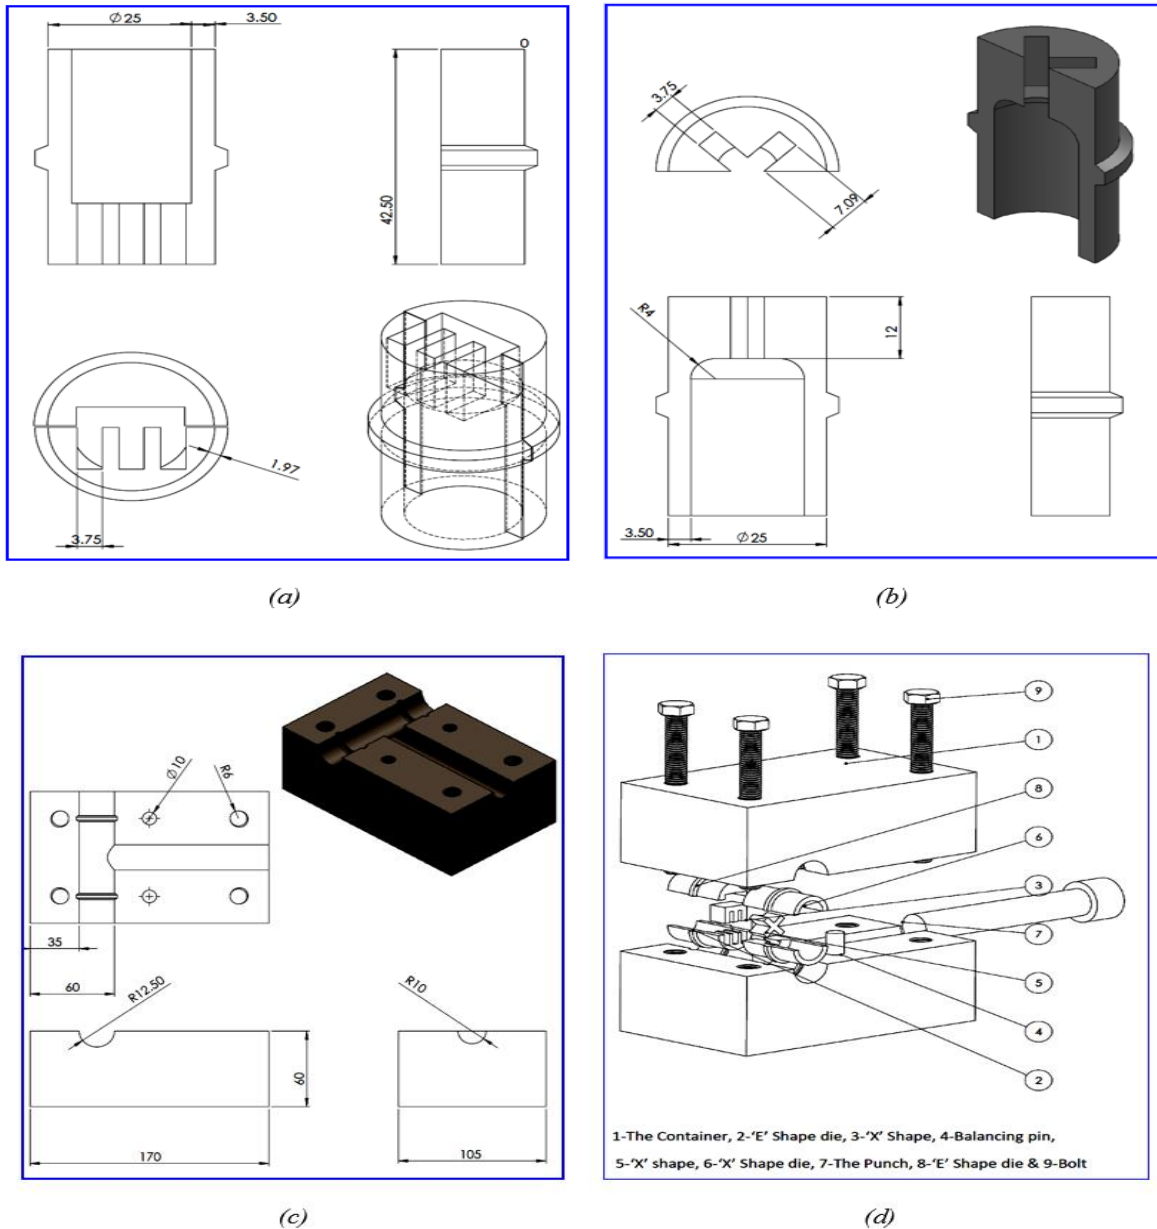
the Drawings (a) 'E' Shape die, (b) 'X' Shape die, (c) Half part of the container (d) Coupled tool
